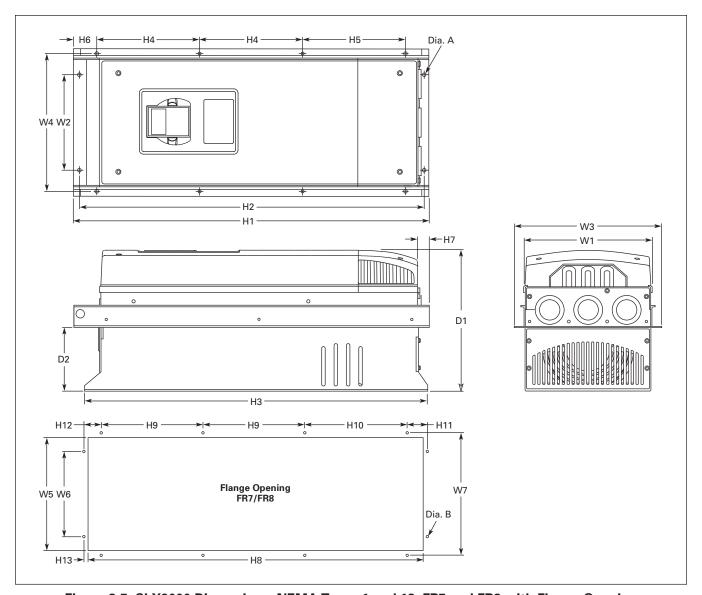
SLX9000 Dimensions, NEMA Types 1 and 12, FR7 and FR8 with Flange Opening
